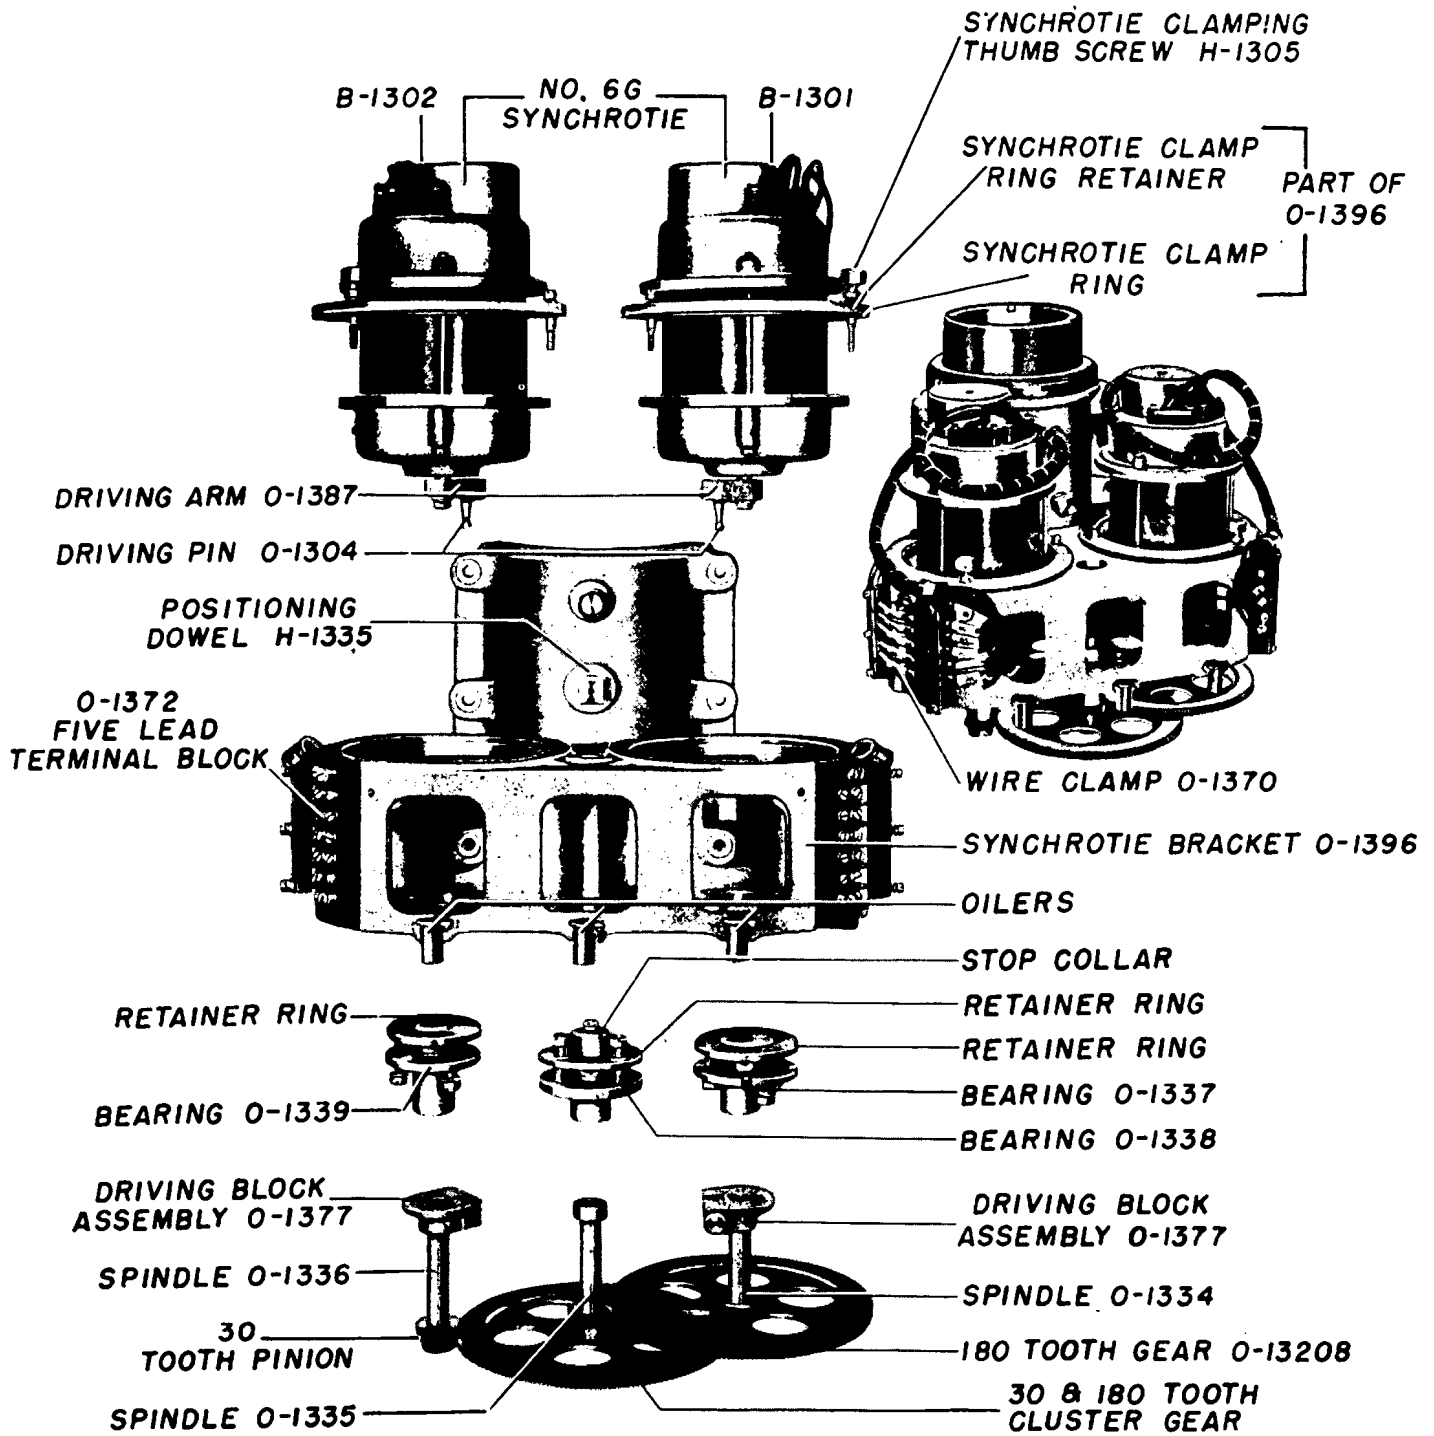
Sychrotie Bracket Assembly, Disassembled View
